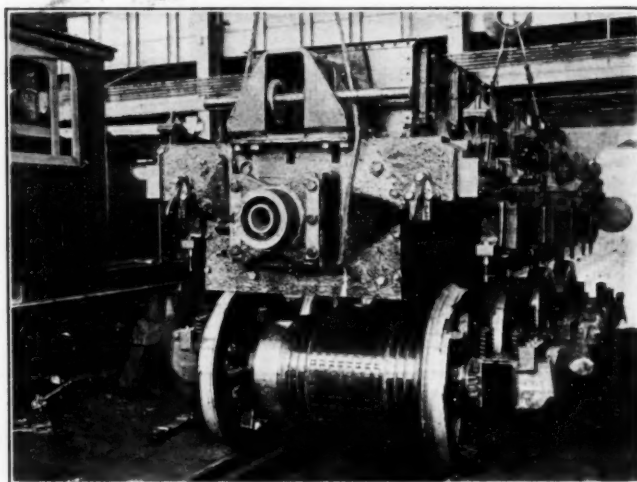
3000-VOLT BIPOLAR ELECTRIC PASSENGER LOCOMOTIVE, C. M. & ST. P. RY., PARTLY ASSEMBLED
